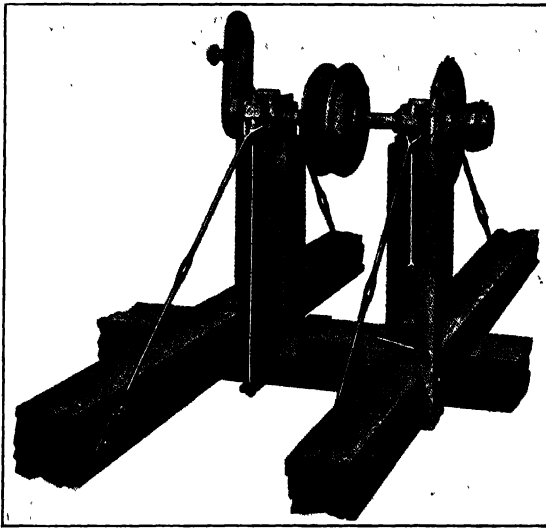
Showing assembly of crank, wrist pin, crank shaft, band wheel gudgeons, sprocket, clutch, braces and supporting posts and sills.
